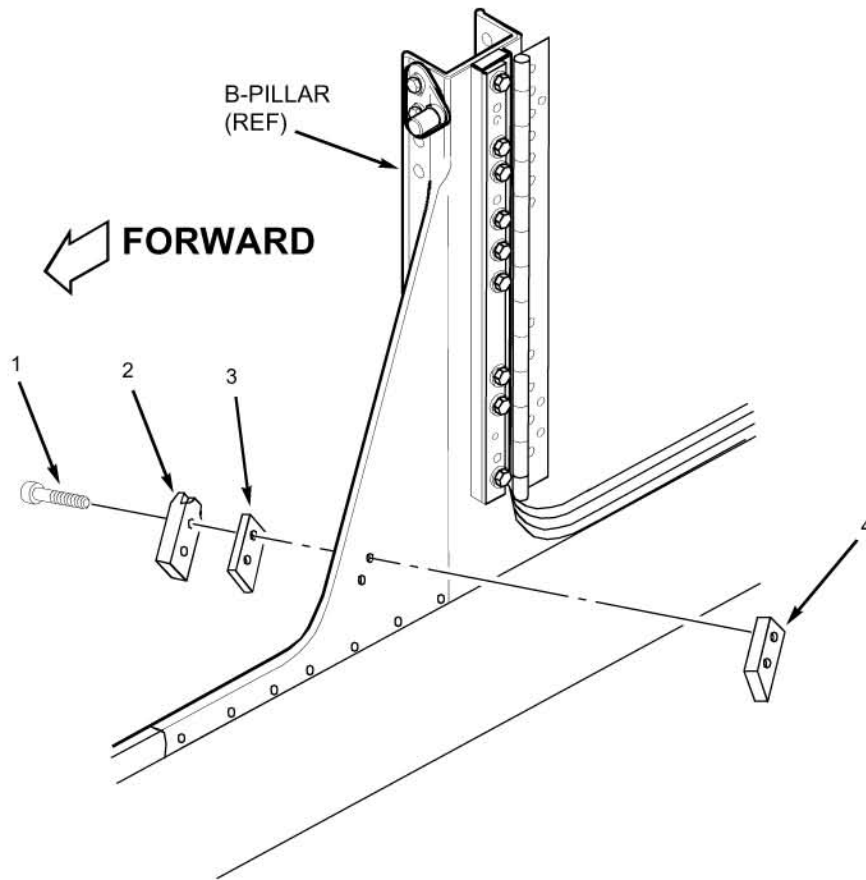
Front Door Ramp Block (2 and 4 Door)
